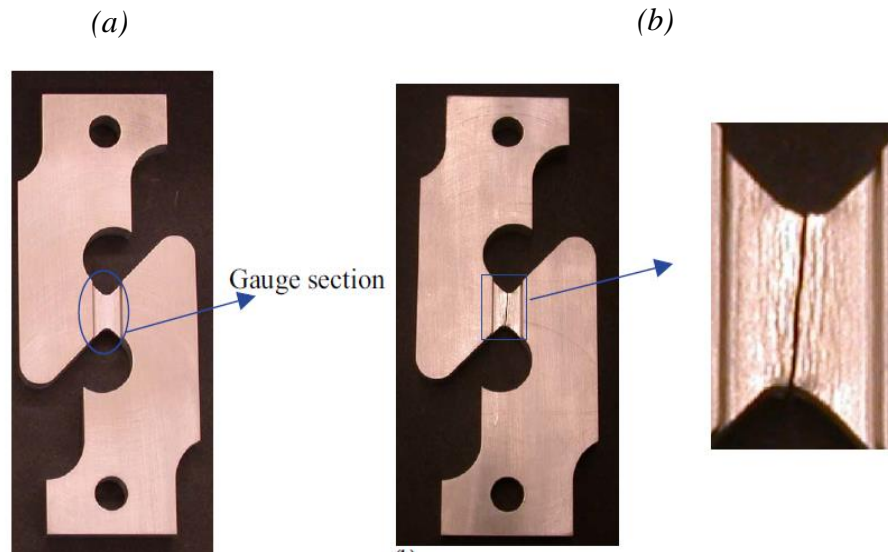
Pure Shear Specimen, a) Undeformed Specimen, b) Fractured Specimen, adopted from Bao and Wierzbicki [12].
